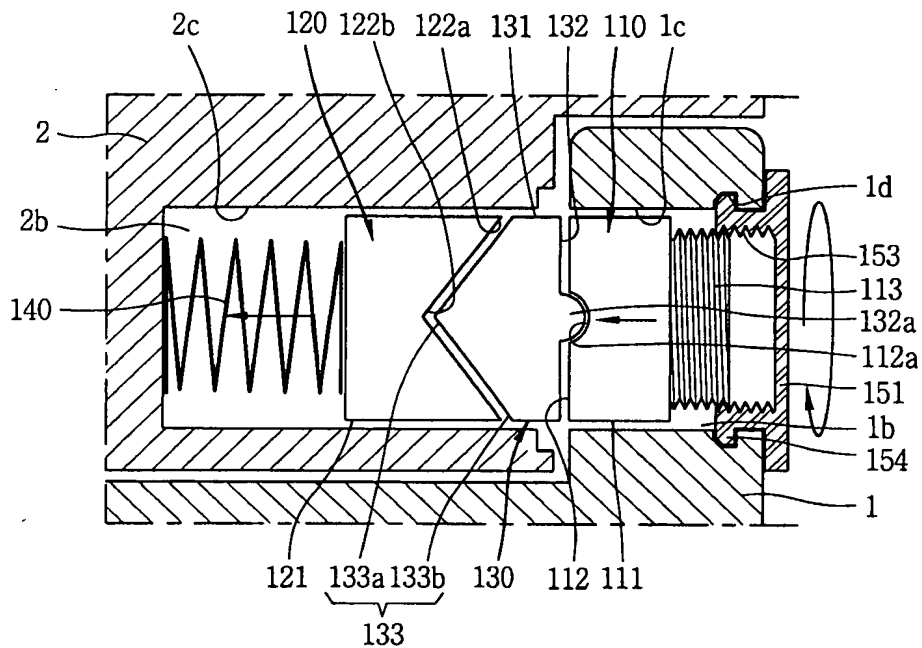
is a cross-sectional view of a mechanical assembly. The assembly includes a housing (2) with a central cavity (2c) containing a spring (140). A piston (120) is positioned within the cavity, with a tapered tip (121) and a flange (122a). The piston is connected to a rod (130) which passes through a seal (132) and a bush (133). The rod is further connected to a lever (151) which is pivoted on a pin (153). The lever has a curved end (154) and a contact point (152). The entire assembly is mounted on a base (1).
